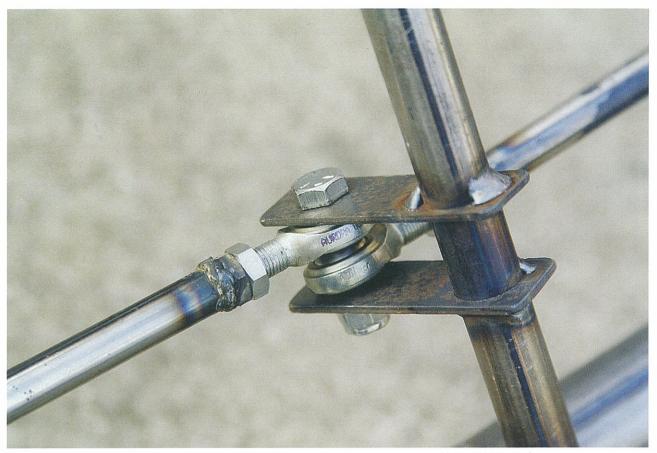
Track-rod inner ends secured to steering column track-rod plates. (Steve Williams)
